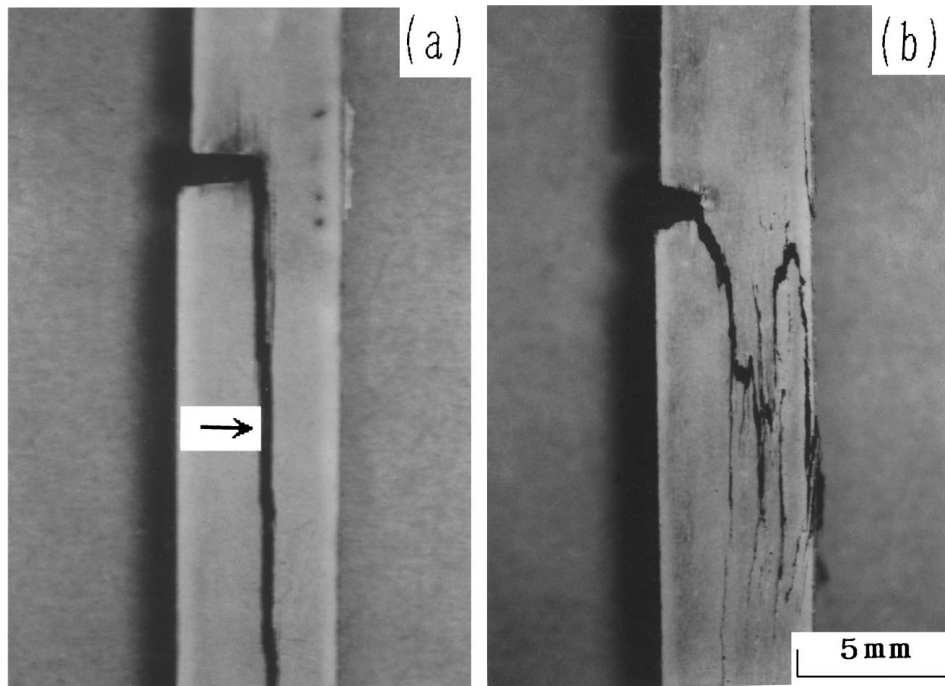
Appearance of the specimens during tensile test showing occurrence of the longitudinal cracking for (a) long and (b) short distances. Some specimens showed (a) and others (b) prior to the overall fracture. The fracture surface of the longitudinally cracked portion indicated by the arrow in (a) will be shown later in Fig. 3.
